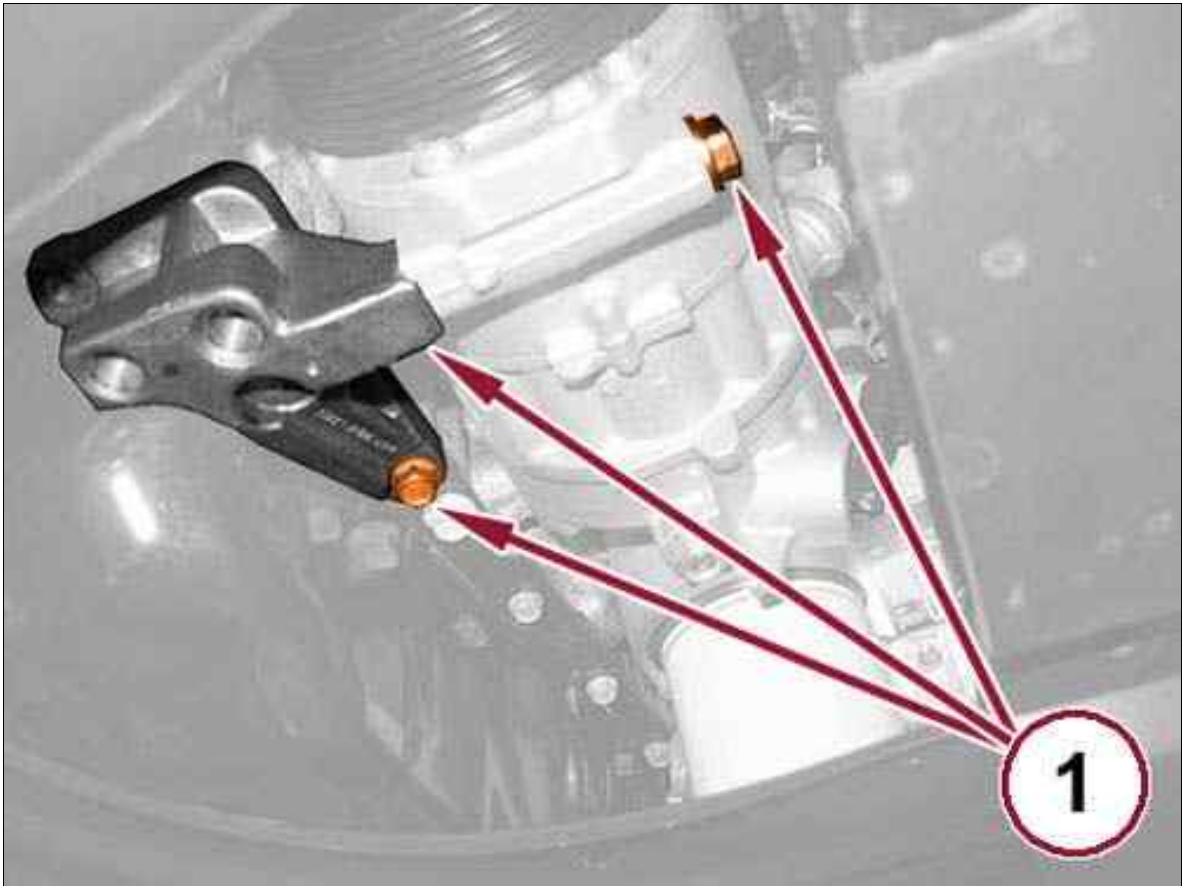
Engine Timing Cover To Engine Block & Engine Oil Pan Bolts
